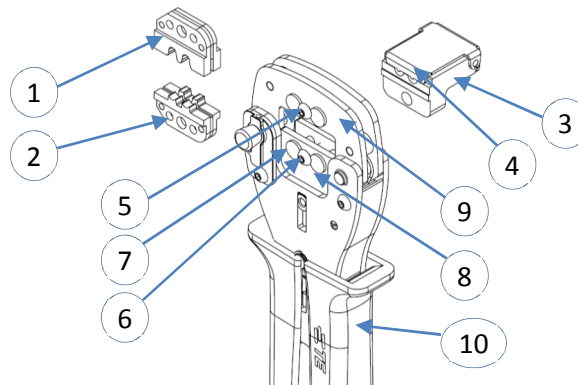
Exploded diagram of the hand tool including crimping die set
